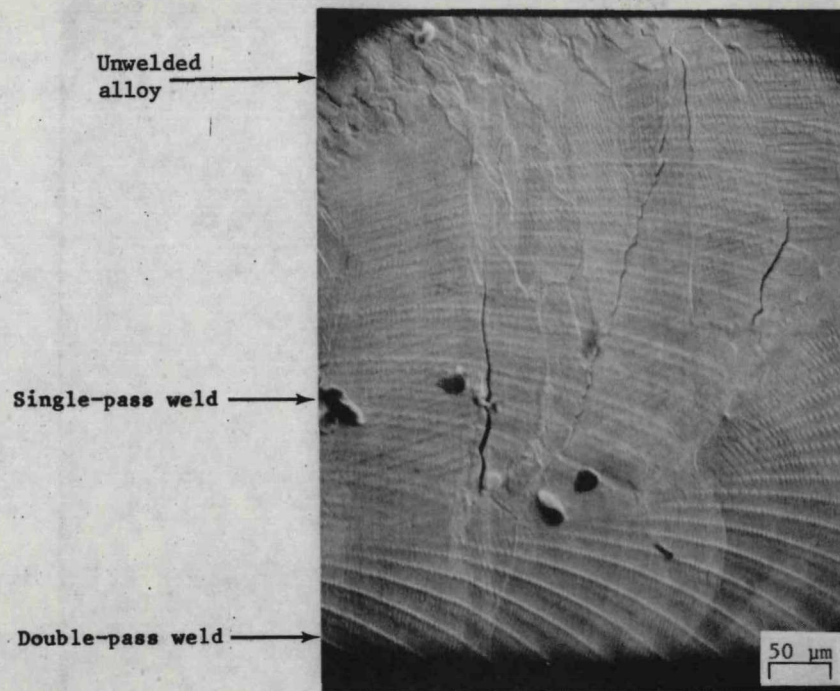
Small Cracks in Single-Pass Weld Adjacent to Double-Pass Weld.
